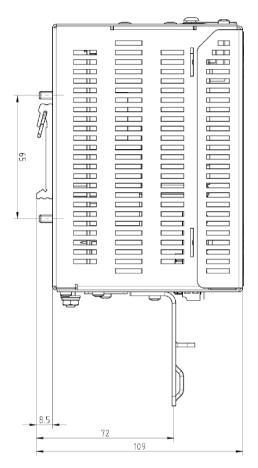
Dimension drawing IE Switch X302-7EEC - side view
